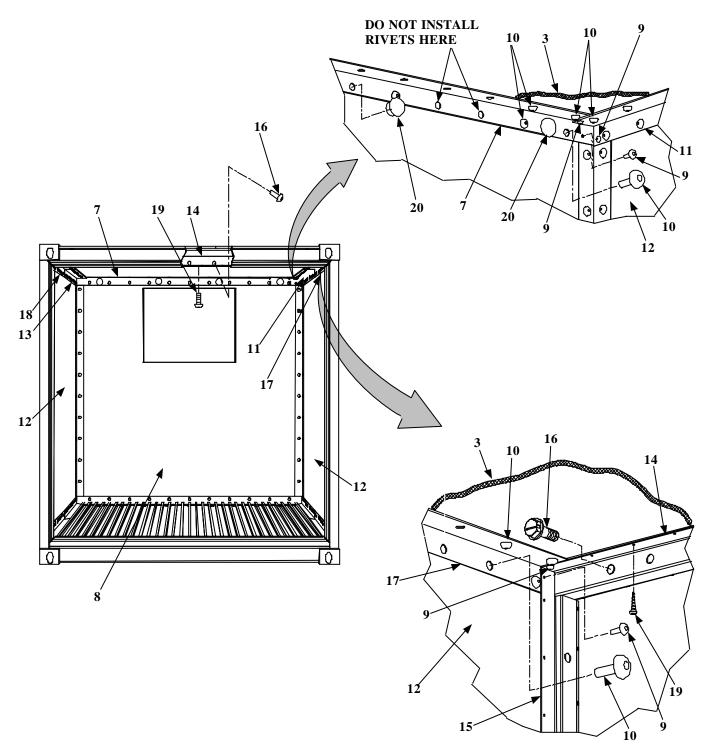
Roof Panel Installation (Sheet 2 of 2)
